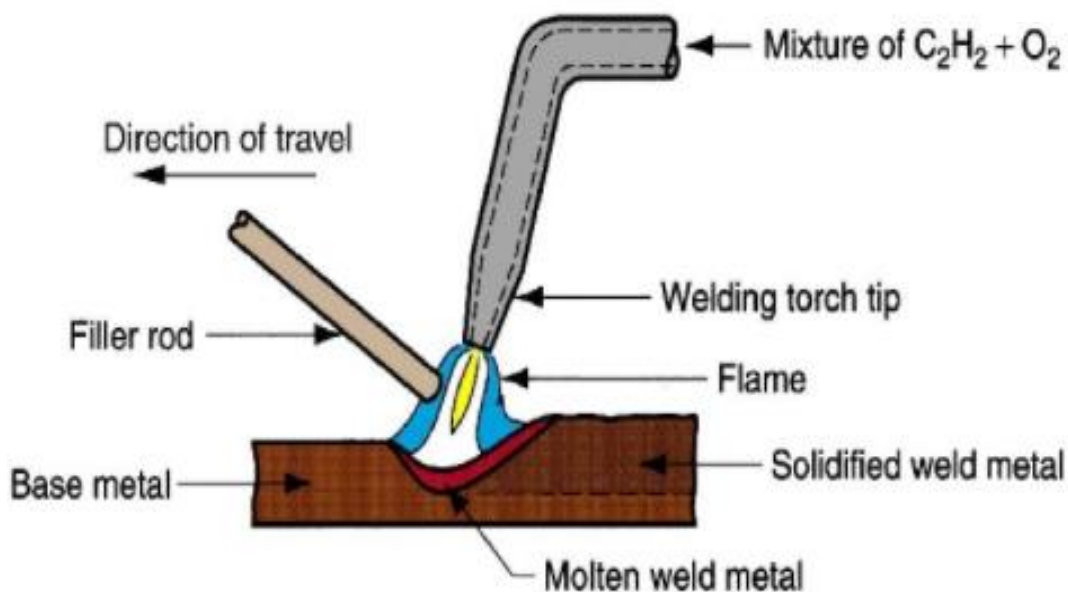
Typical oxy-acetylene welding system [56]
